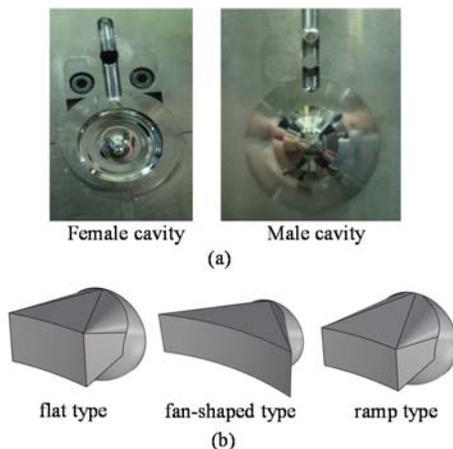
Mold design, (a) cavity of the mold, (b) three types of gates tested in this study.
